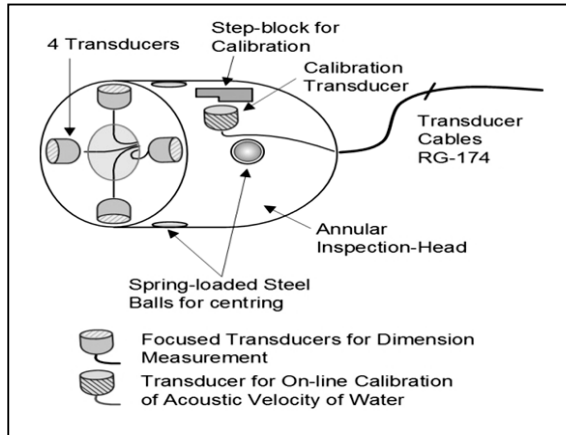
Schematic of Inspection head assembly for Gauging of PT
